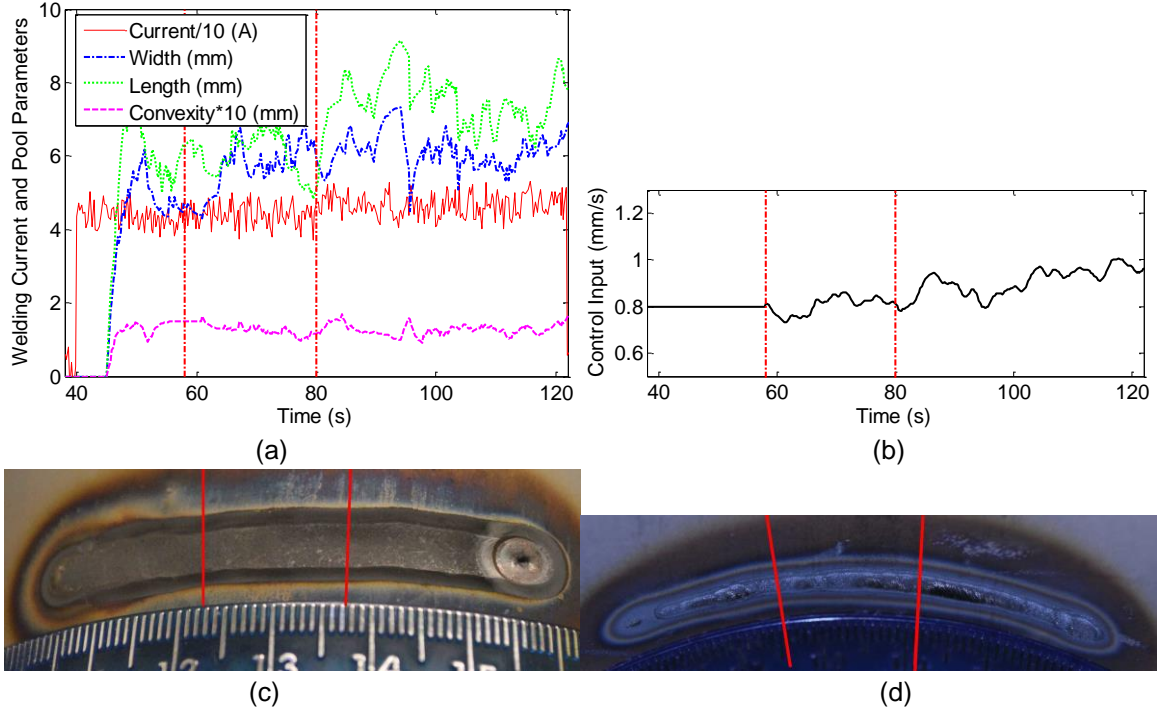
Experiment 1 results (a) Welding current and weld pool parameters (b) Control input (c) Front-side bead (d) Back-side bead.
